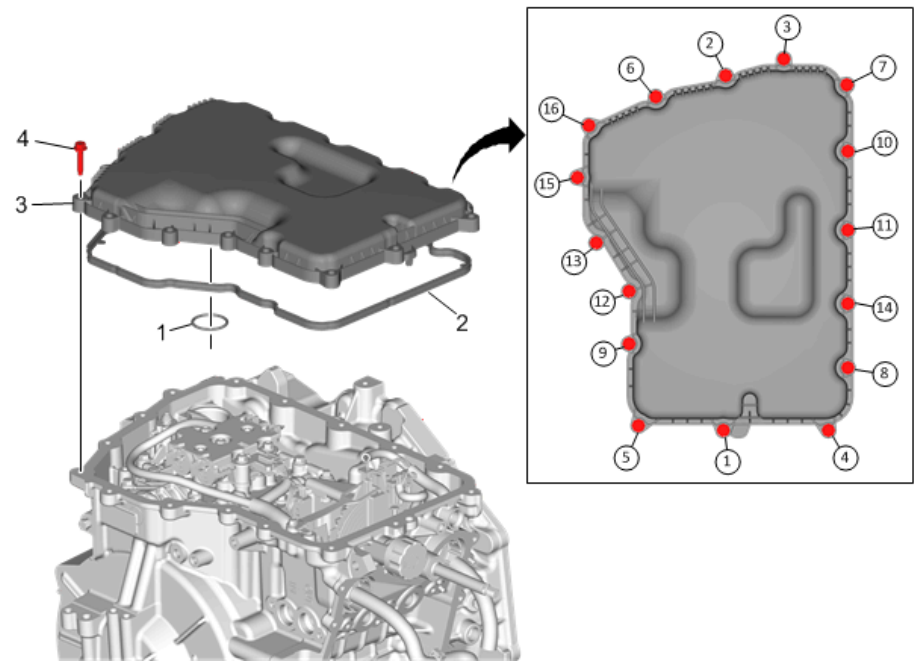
Control Valve Body Cover (With Bolt Tightening Sequence)
